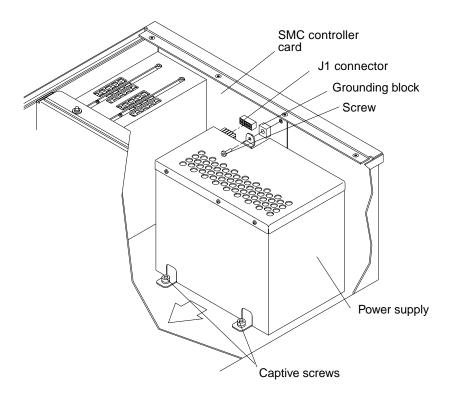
Removing the Screws Inside the Chassis from the Power Supply
